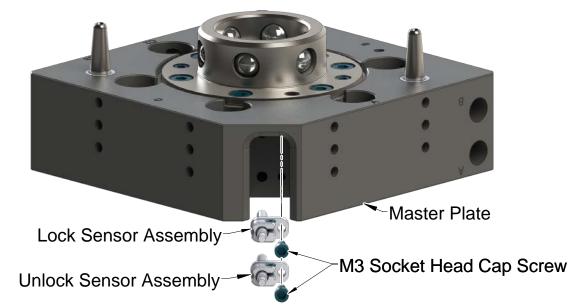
Lock and Unlock Sensor Assembly Replacement
